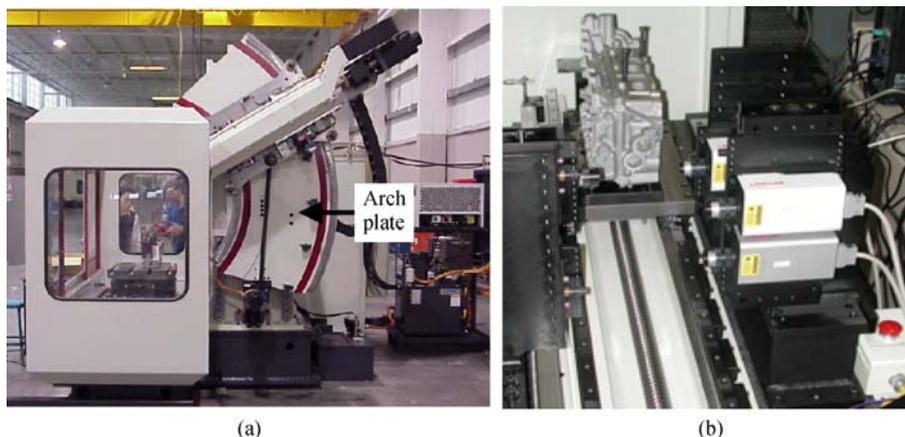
Reconfiguration machine tool (RMT) and reconfigurable inspection machine (RIM) developed at the ERC-RMS. (a) RMT; (b) RIM
